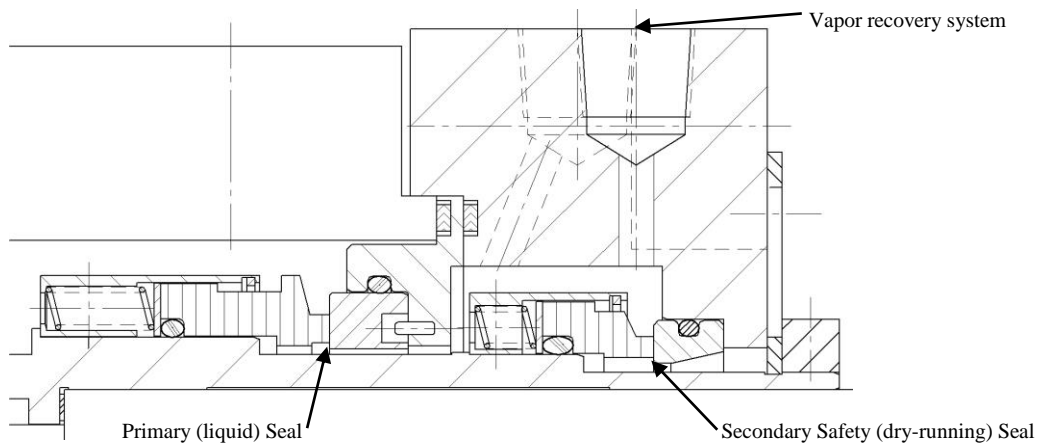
Typical dual unpressurized pusher seal arrangement using a dry-running safety containment seal outboard
